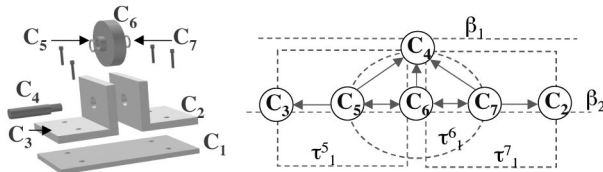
Wheel support assembly (exploded view) and RG at $T=1$ for $C = \{C_5, C_6, C_7\}$
